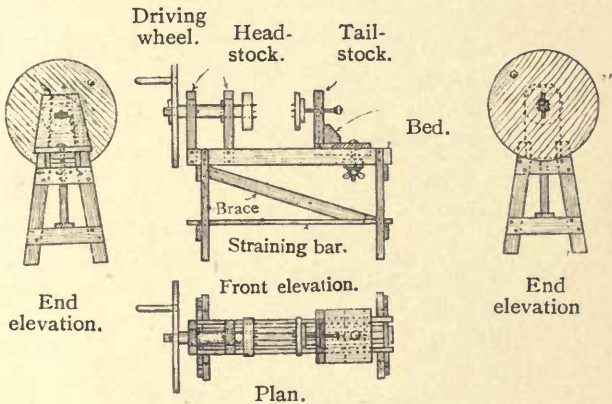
WINDING MACHINE FOR ELECTRICAL REELS.
